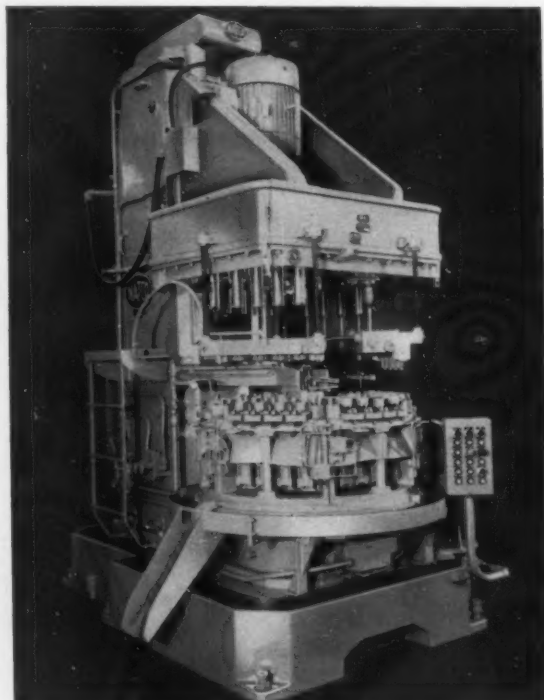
Vertical Holesteel drilling machine brought out by the National Automatic Tool Co., Inc.
